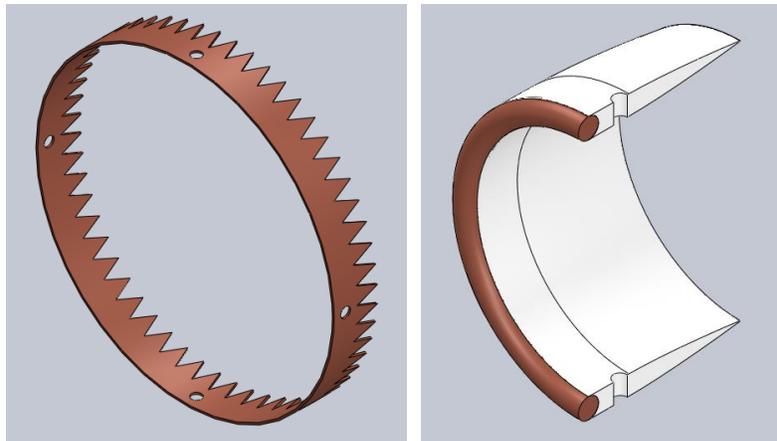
Sawtooth Emitter Geometry (left) and the Section View of the Collector (right)
